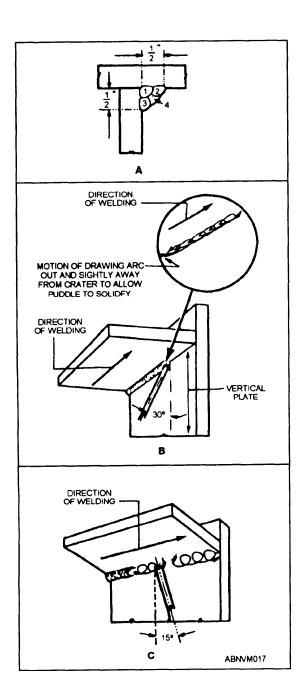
Fillet welding of a T-joint in the overhead position.
